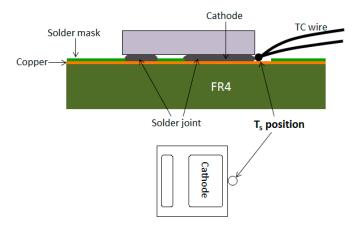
The recommended temperature measurement point T_s is located on the cathode copper layer of the PCB, closest to the package. The picture above shows where to place the welding tip of the TC wire prior to dispensing any thermal conductive epoxy to secure the TC wire.
